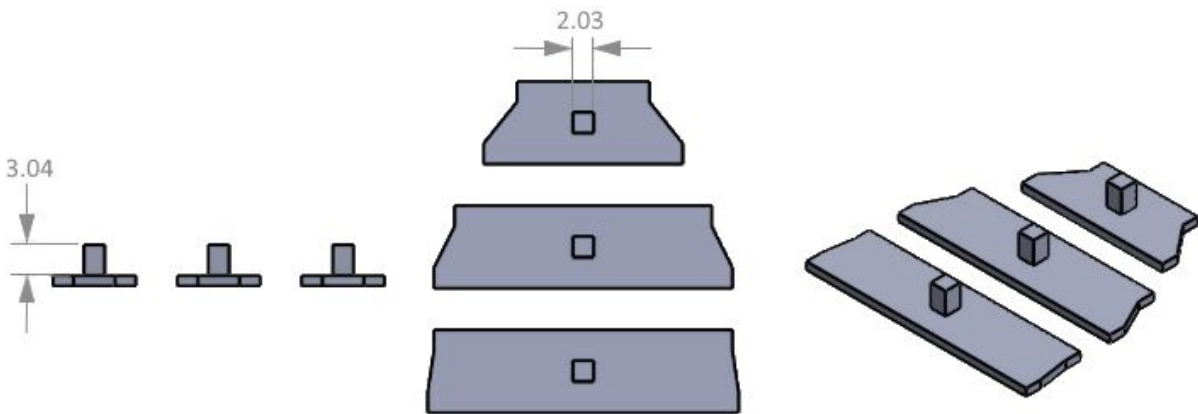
Solidworks drawing of inserts for the recommended pneunet design.
